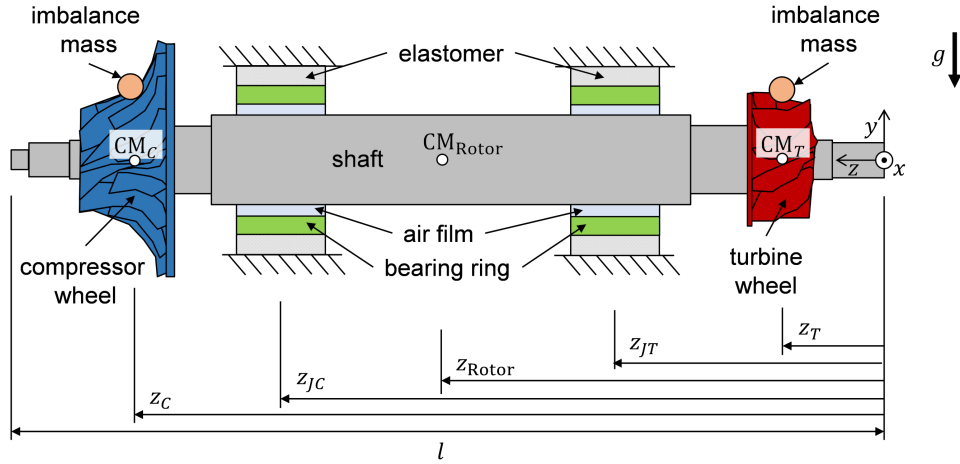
High-speed rotor system: Turbo-compressor supported in two air ring bearings, see [41]
